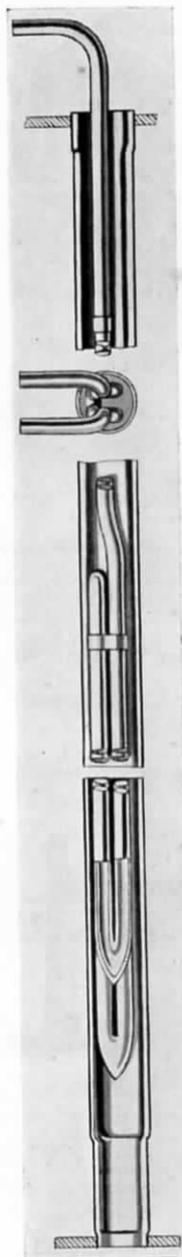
STANDARD "A" TYPE SUPERHEATER ELEMENT.
